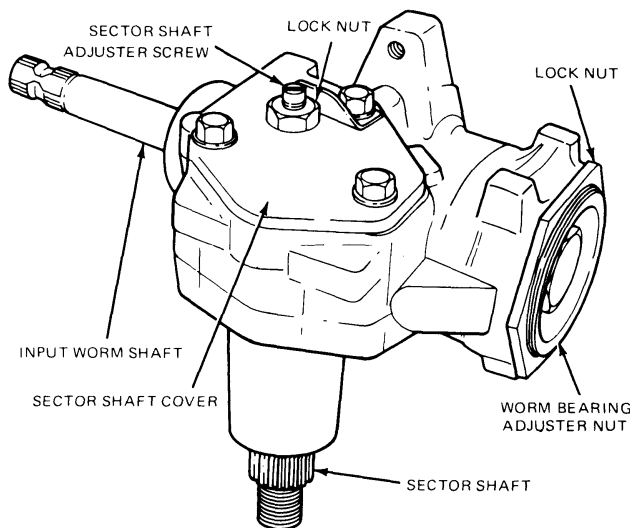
Manual Steering Gear—Recirculating Ball—F-100 thru F-350 (4 x 2), E-100—E-350
